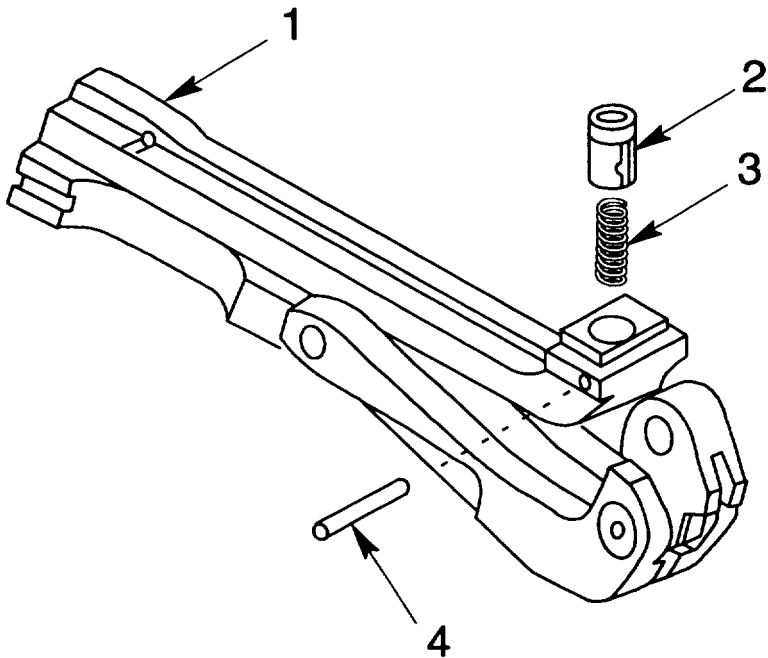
Breech Body Assembly Bolt, PN 11826040
